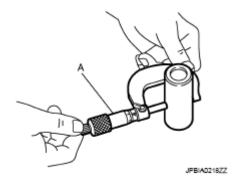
Measuring Outer Diameter Of Piston Pin Using Micrometer Courtesy of NISSAN MOTOR CO., U.S.A.
